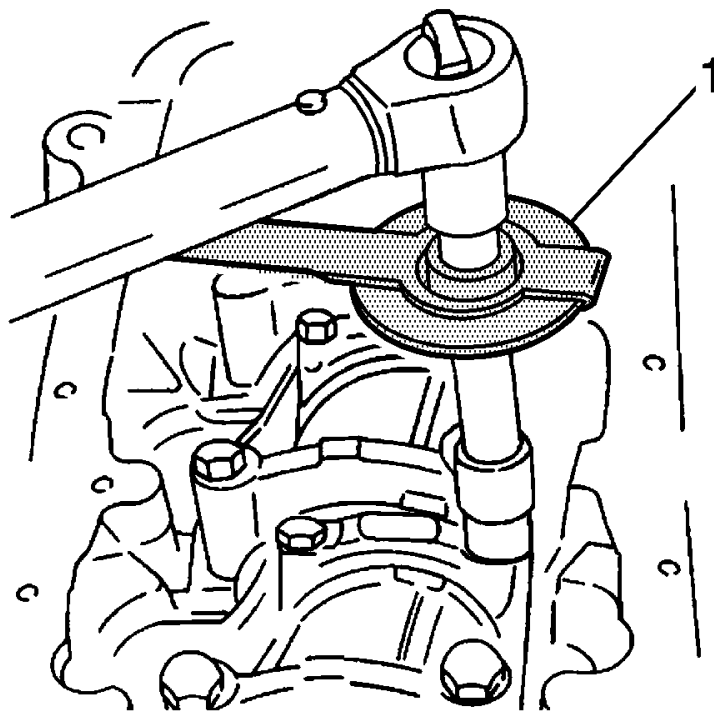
Using J 45059 Or KM-470-B To Torque Rod Bolts
